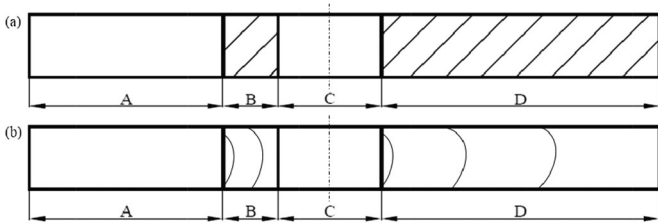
Specimen cross-section: a) different parts divided on the cross-section; b) beach marks recorded on the cross-section.
